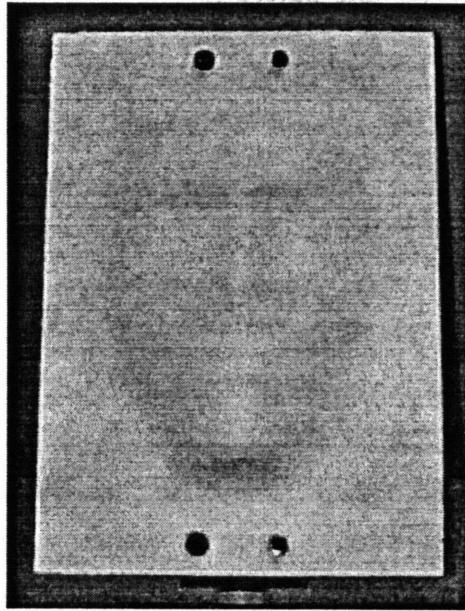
Face Impression Made By Flexible Sheet Metal Press
